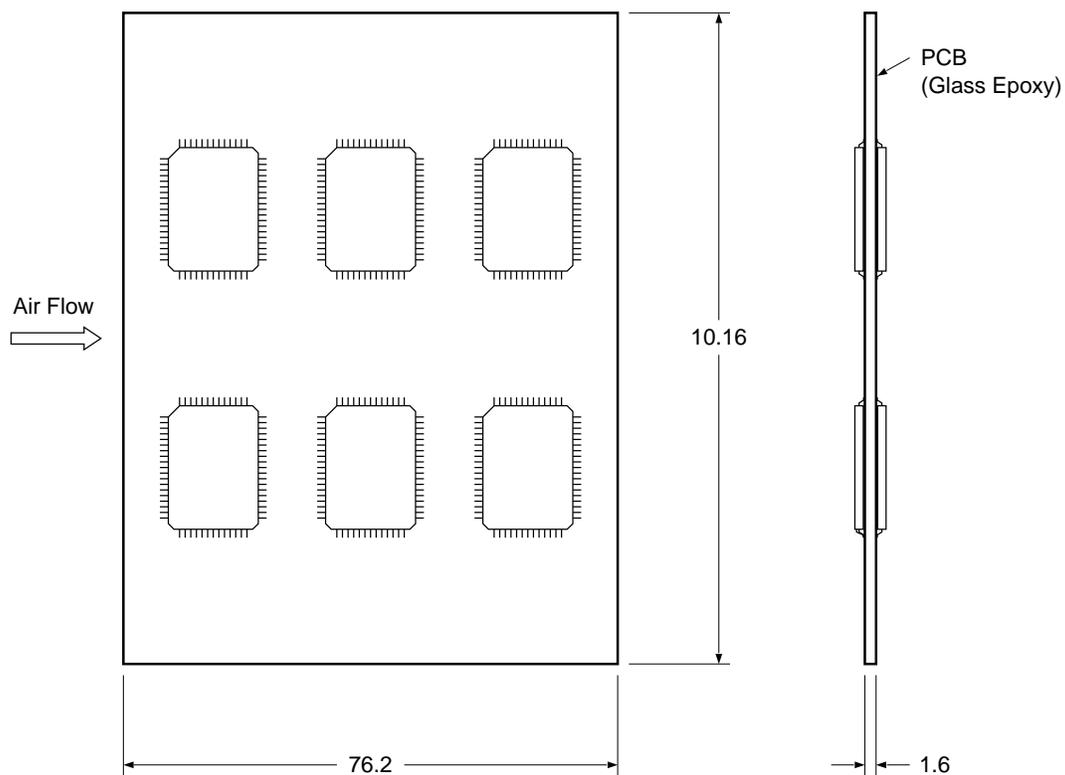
Mechanical drawing of the mounting, without heat sink
